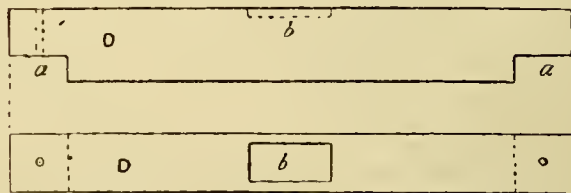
CROSS-PIECE OR SUPPORT FOR NECK OF SAW SPINDLE.
